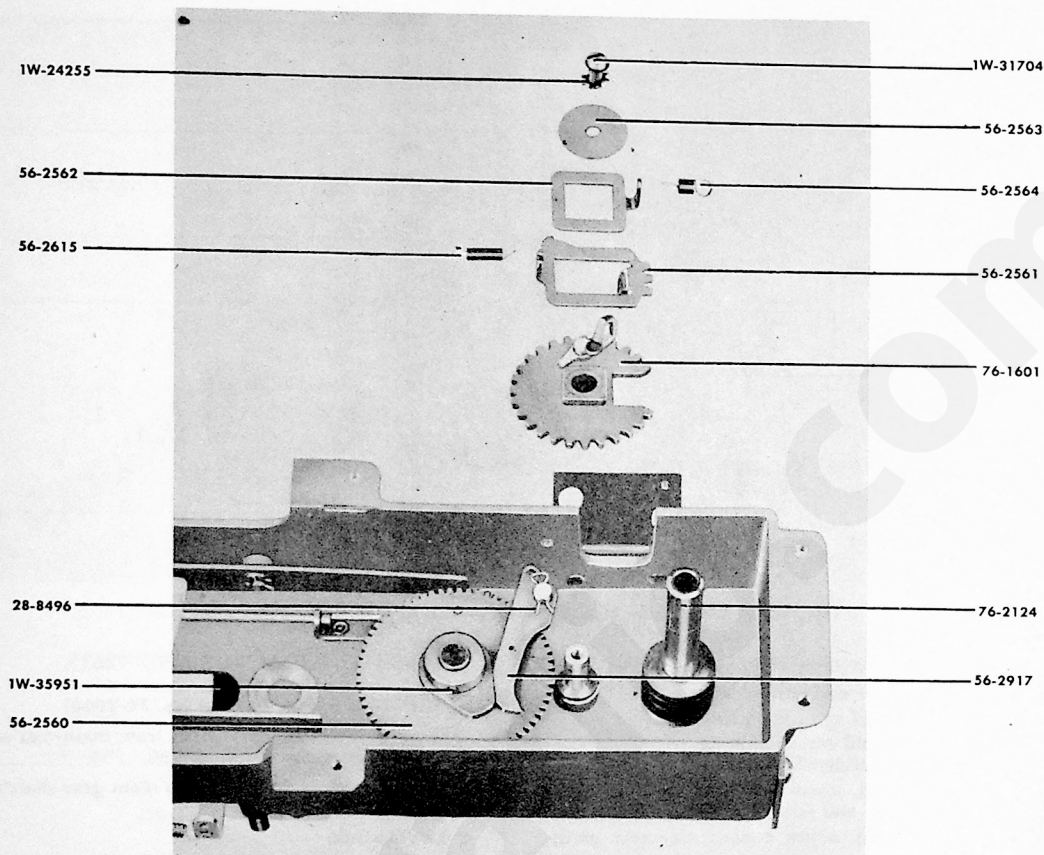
CHANGER MECHANISM, DISASSEMBLY OF INTERMEDIATE GEAR.
